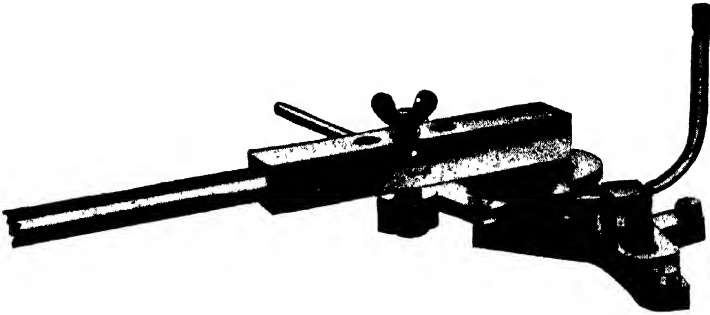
LIGHT-GAUGE-TUBE BENDER FOR TUBES UP TO 1 IN. DIAMETER
